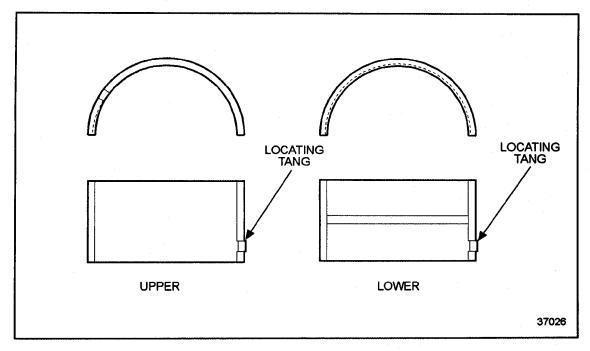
Connecting Rod Bearing Detail for Pleasure Craft Marine (Closed End Rod)
